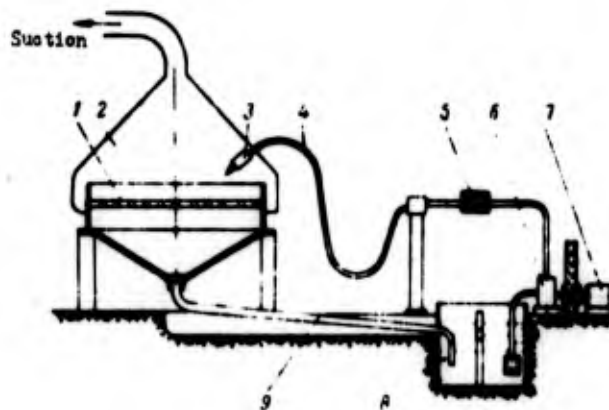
Bath for hand washing of parts: 1 - grid; 2 - ventilation system; 3 - nozzles; 4 - flexible hose; 5 - filter; 6 - pump; 7 - electric motor; 8 - settling tank; 9 - overflow pipeline.
